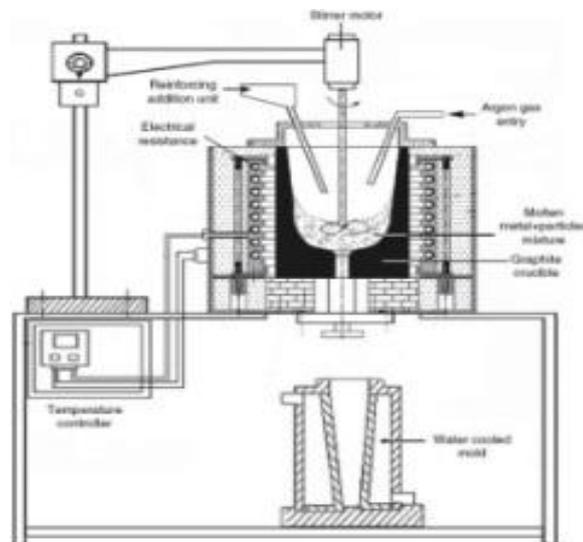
Stir casting machine (equipped with inert gas source and pour molten system)[22]
